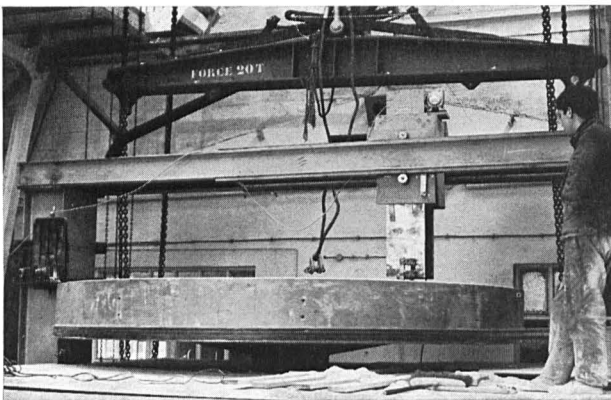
Table of large grinding machine in the Works of REOSC with arrangements for milling the 3.6 m silica blank.
